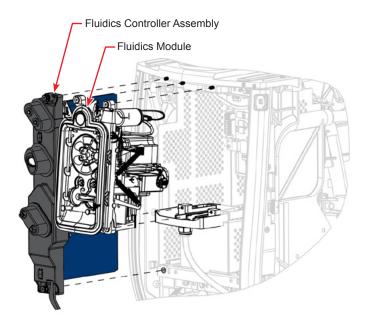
Fluidics Module and Fluidics PCB Assembly Removal
